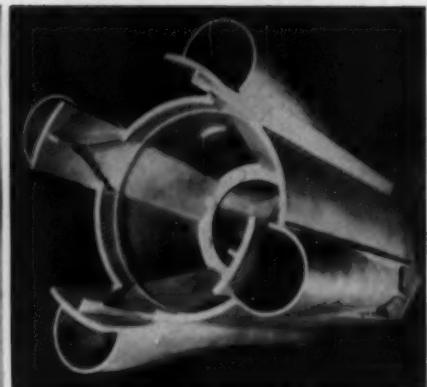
Component for Navy rocket. Aluminum casting (part formerly a sheetmetal assembly) has thin walls, intricate contours and stands about 2 ft high. Plaster mold process was used.
